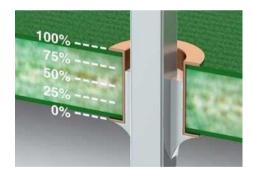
Fill level, minimum 75% vertical solder filling required
